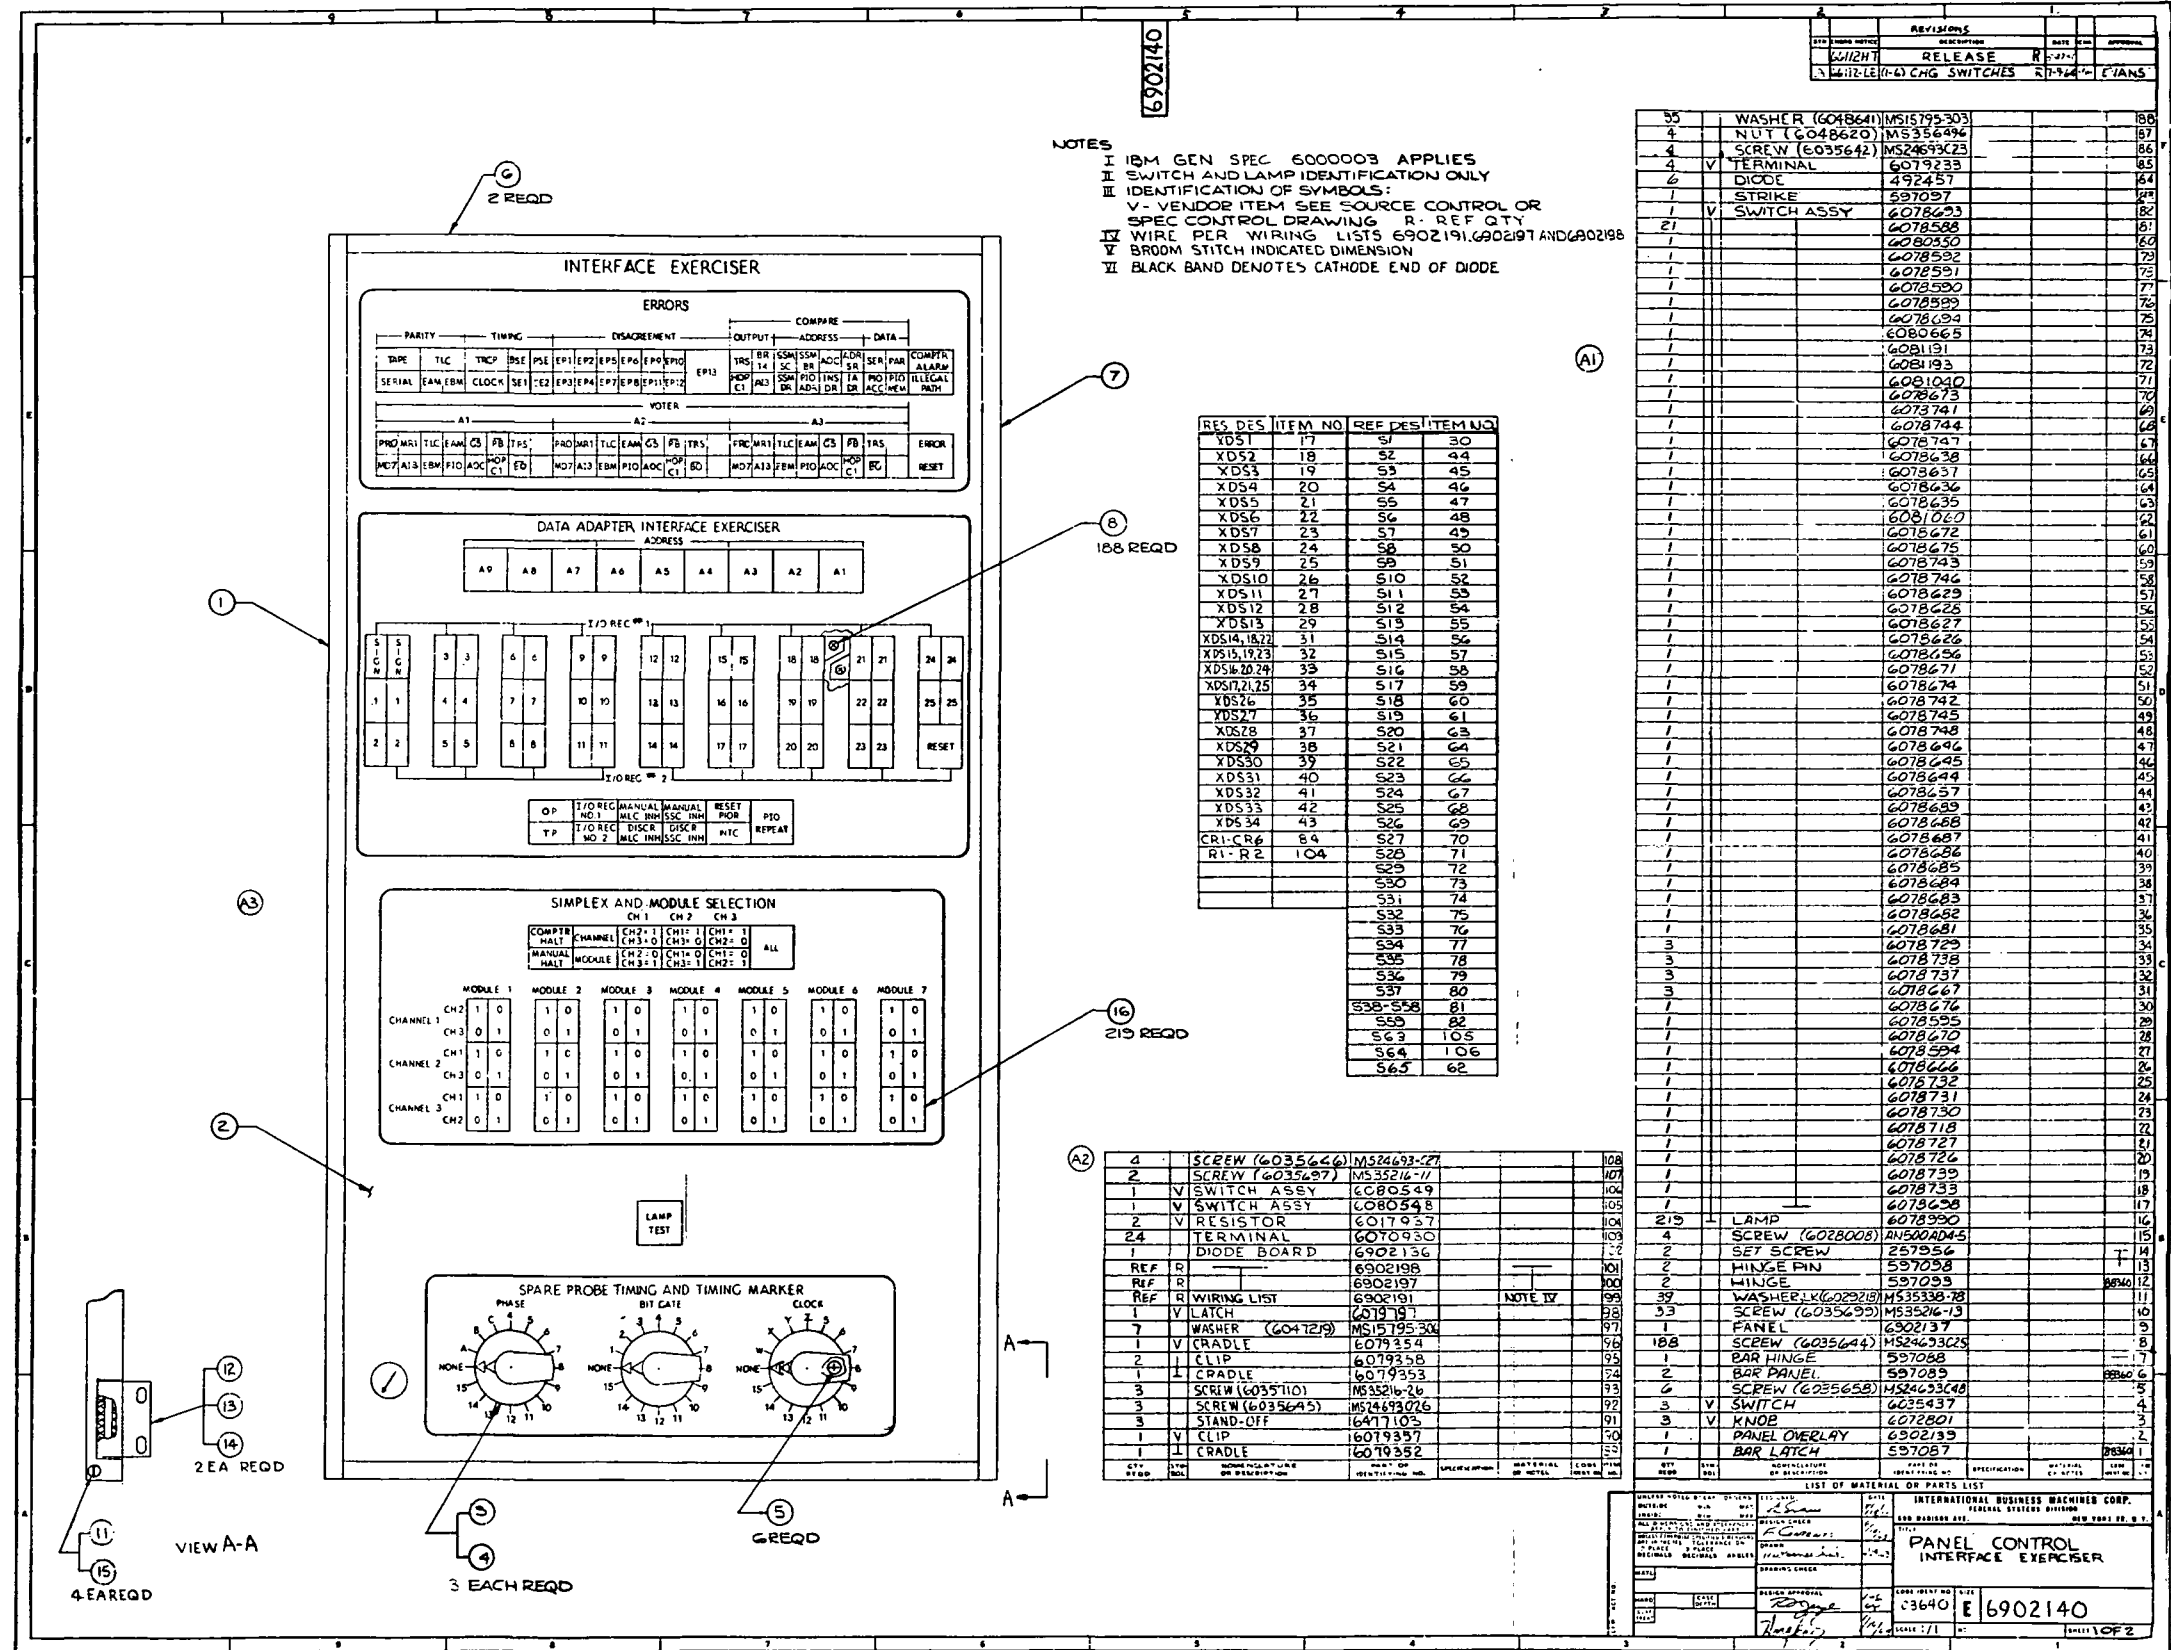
Interface Exerciser Panel (02A2) Assembly Drawing (Sheet 1 of 2)
